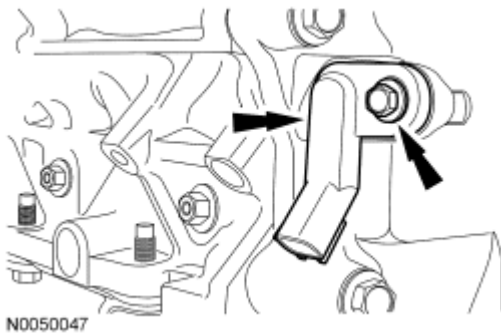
Locating Crankshaft Position (CKP) Sensor Bolt
